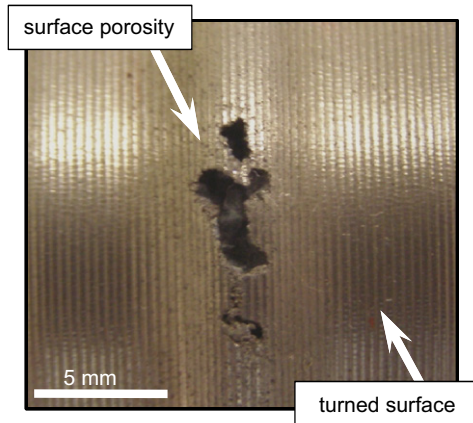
Surface porosity on the machined surface of a casting.
